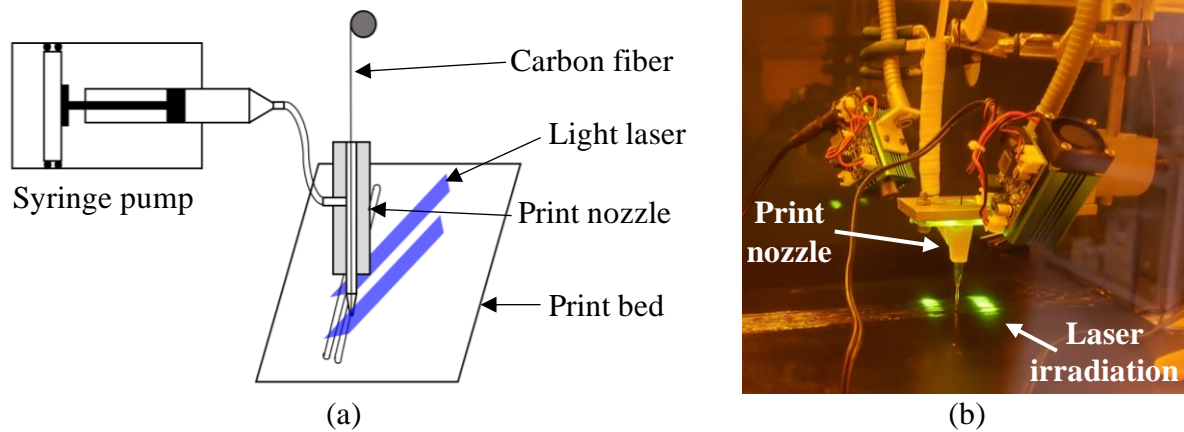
Light-assisted 3D printing process of CCFR thermoset composites (a) schematic diagram of the printing process, (b) real-life picture of the printing set-up.
